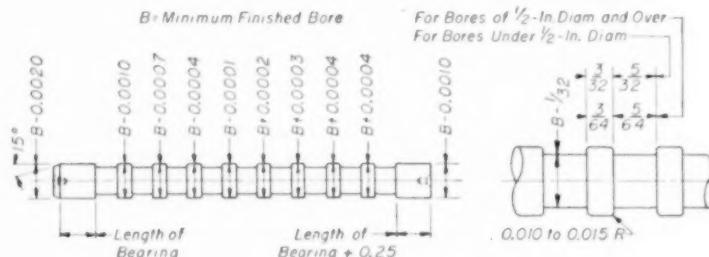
Ball Broach for Burnishing Powder Metal Parts
